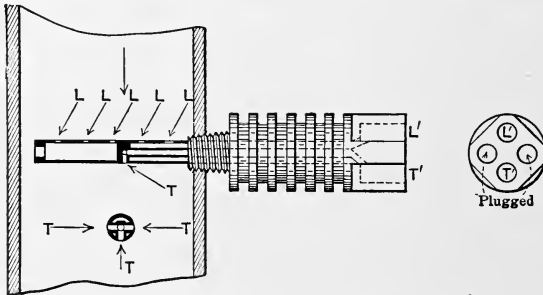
Nozzle Plug; G-E. Steam Meter.
